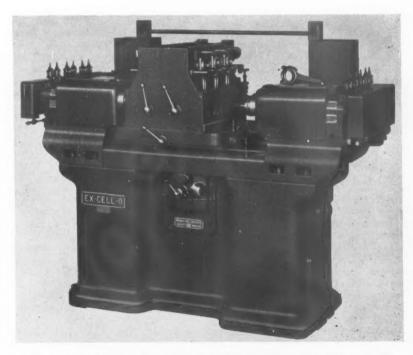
A Junior double end precision boring machine for finish boring the bronze bushings in automobile connecting rods.
